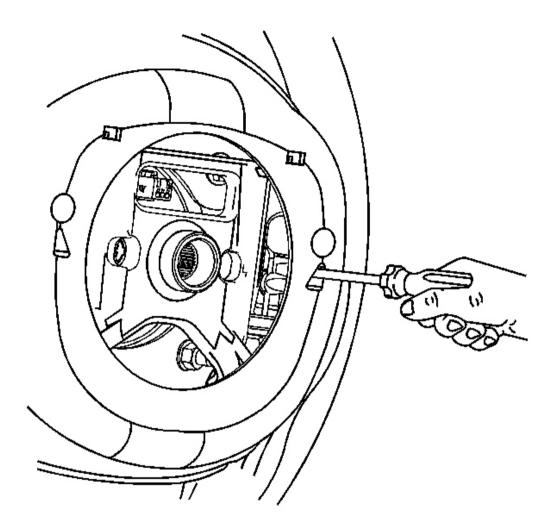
Releasing The Steering Wheel Inflatable Restraint Module Using A Flat-Bladed Tool Courtesy of GENERAL MOTORS CORP.
